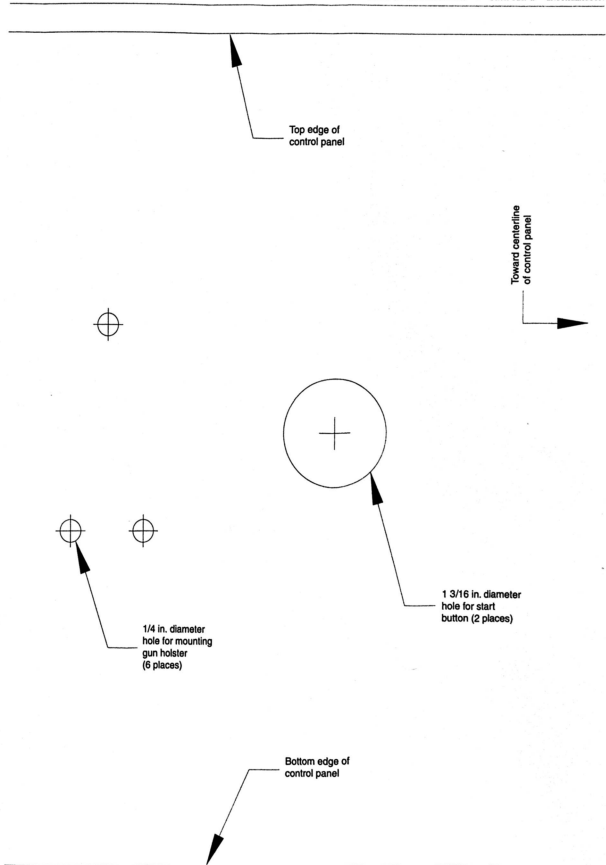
Actual-Size Template for Drilling Control Panel Holes
